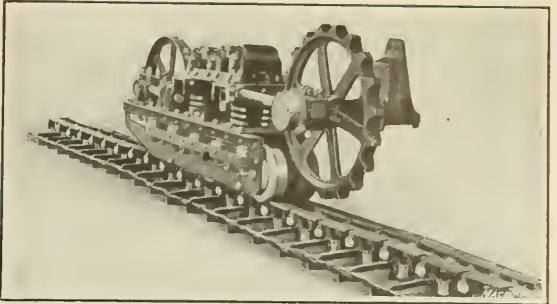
Track Assembly with Track opened out, 75-horsepower Tractor
